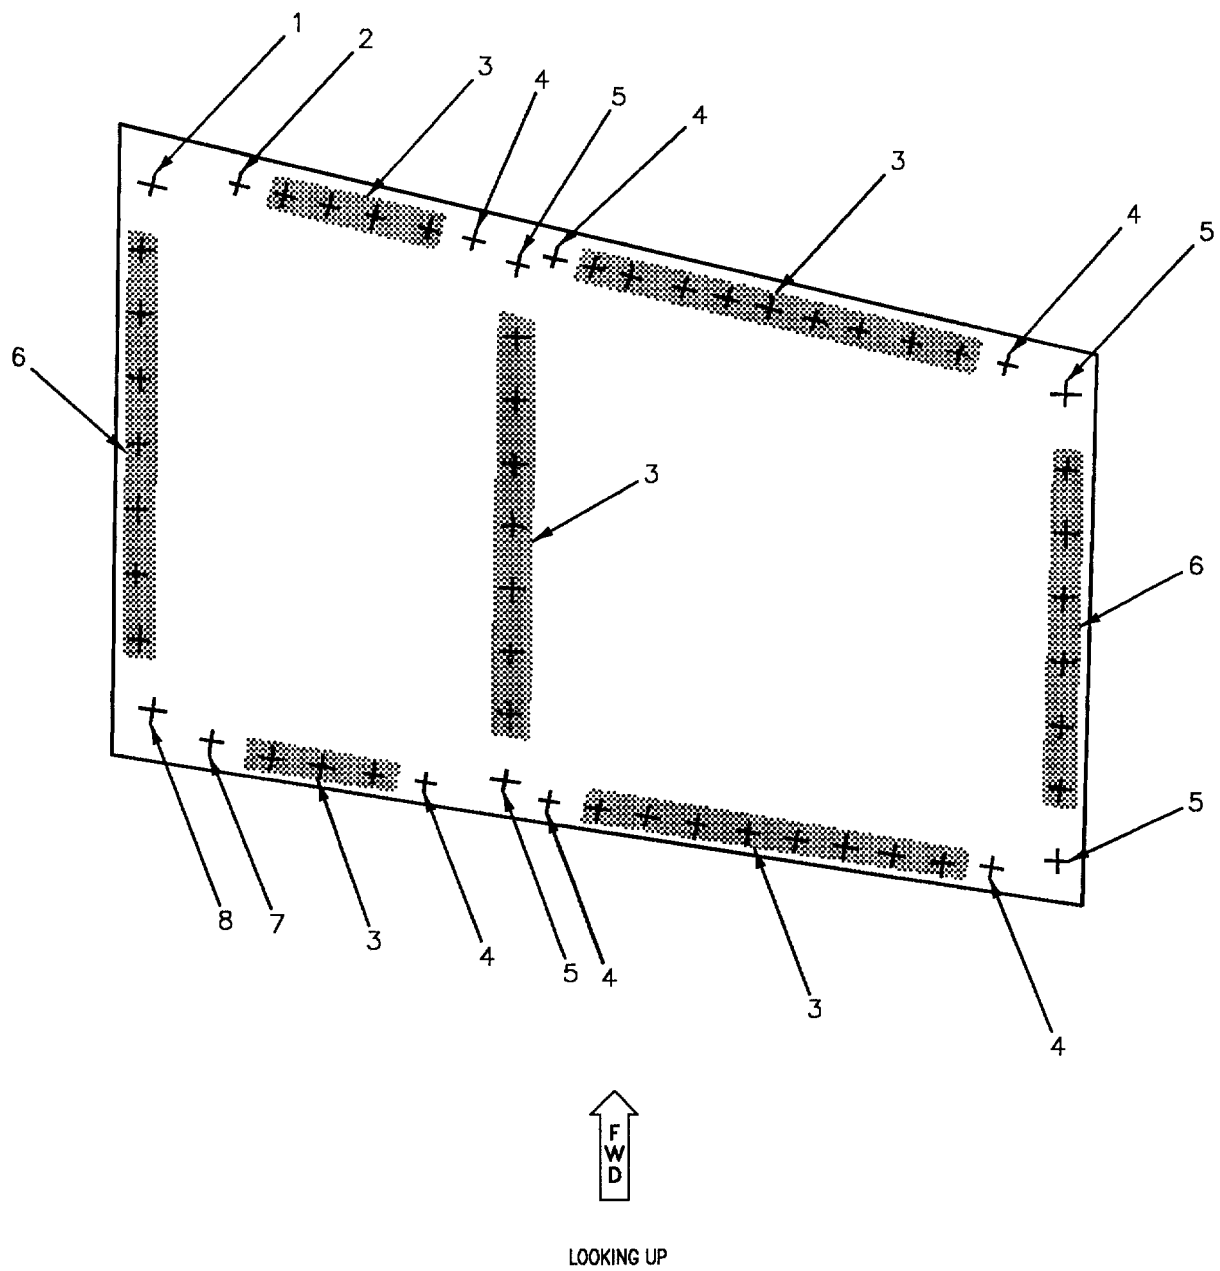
Skin (74A15-824) Replacement (Sheet 1)
